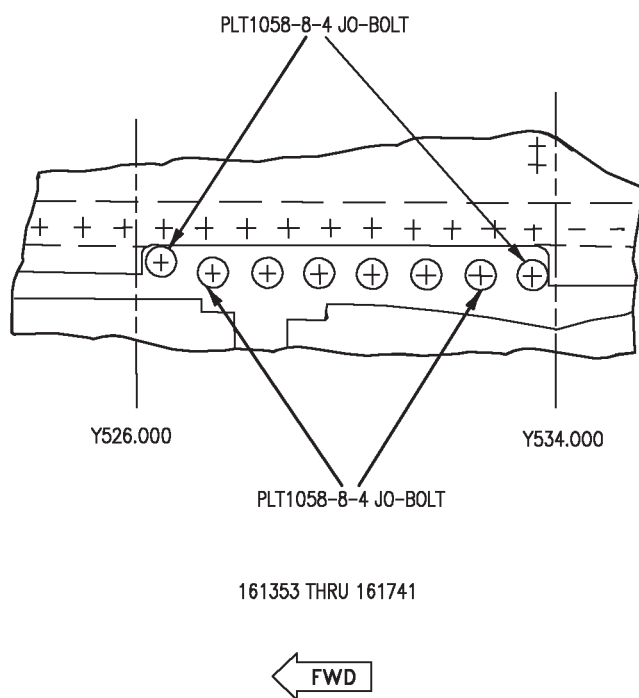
Center Fuselage Y526.000 to Y534.000, Lower Outboard Longerons and Skin Inspection (Sheet 1)
